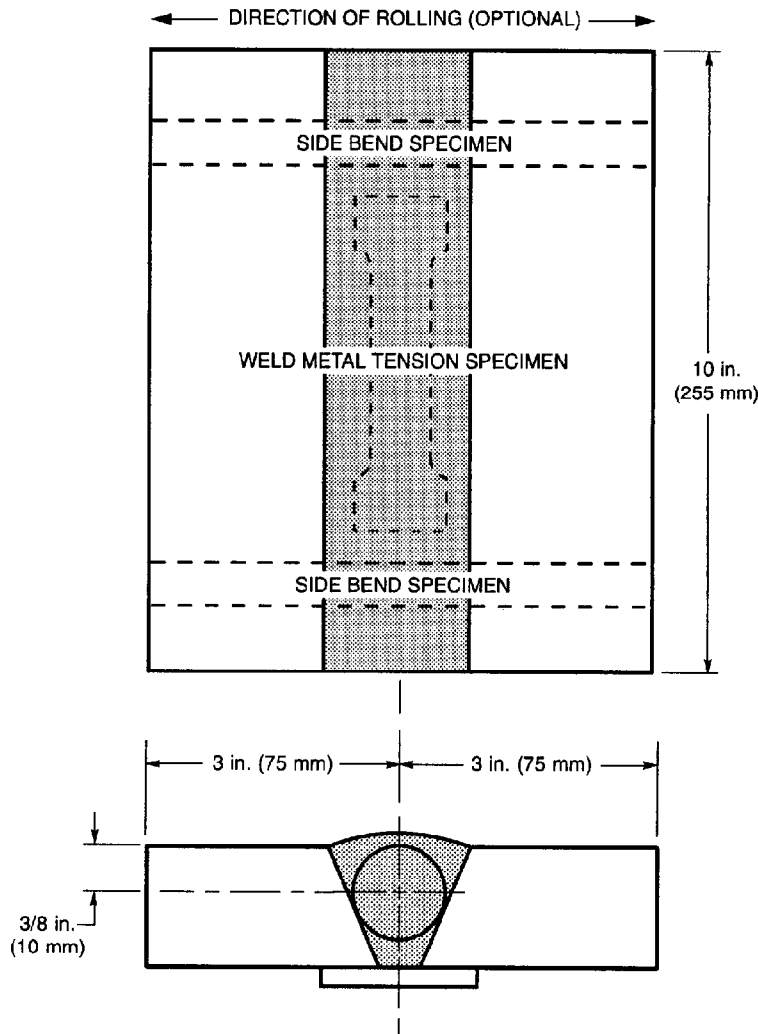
Location of Test Specimen on Welded Test Plate 1 in. (25.4 mm) Thick—Consumables Verification for Fillet Weld WPS Qualification (see 4.11.3)
